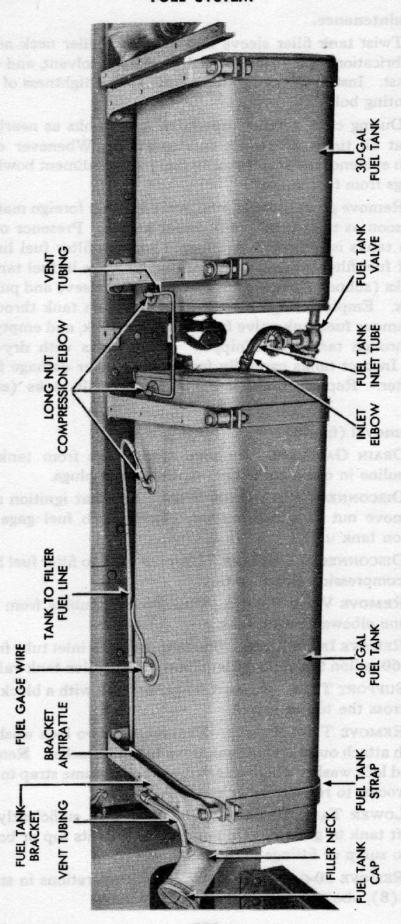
Fuel Tanks Installed (Ponton Body and Deck Plate Removed)
